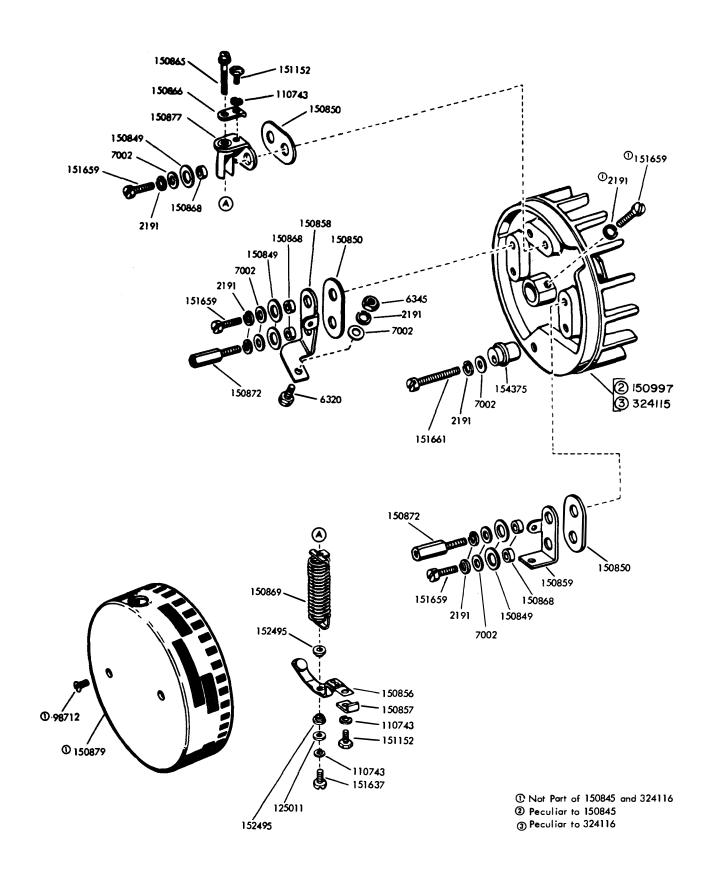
Series Motor Assemblies - Used on LMU39 and LMU41
